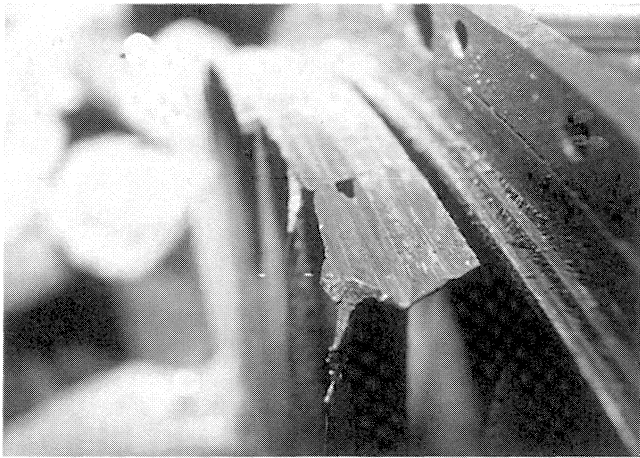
Severe Shroud Tip Rub in Turbine Section of an Aeroderivative Gas Turbine.
